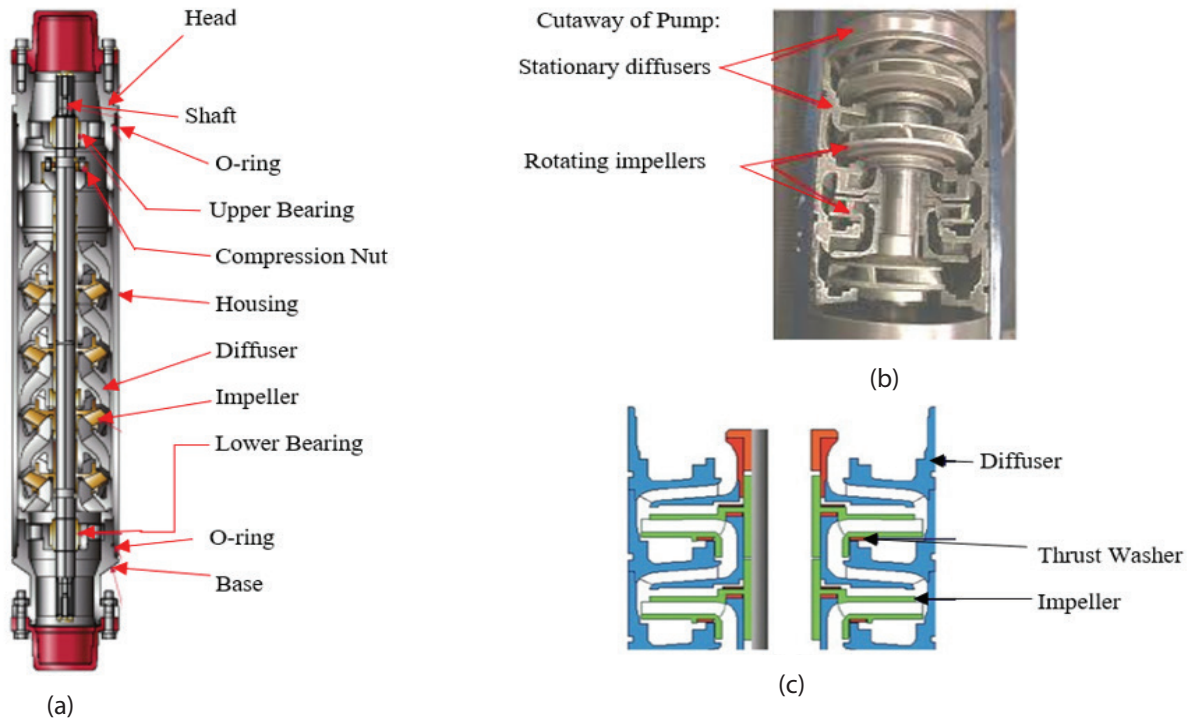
Main parts of single stage ESP (a) multistage pump component (b) cutaway of pump (c) impeller & diffuser [3]
